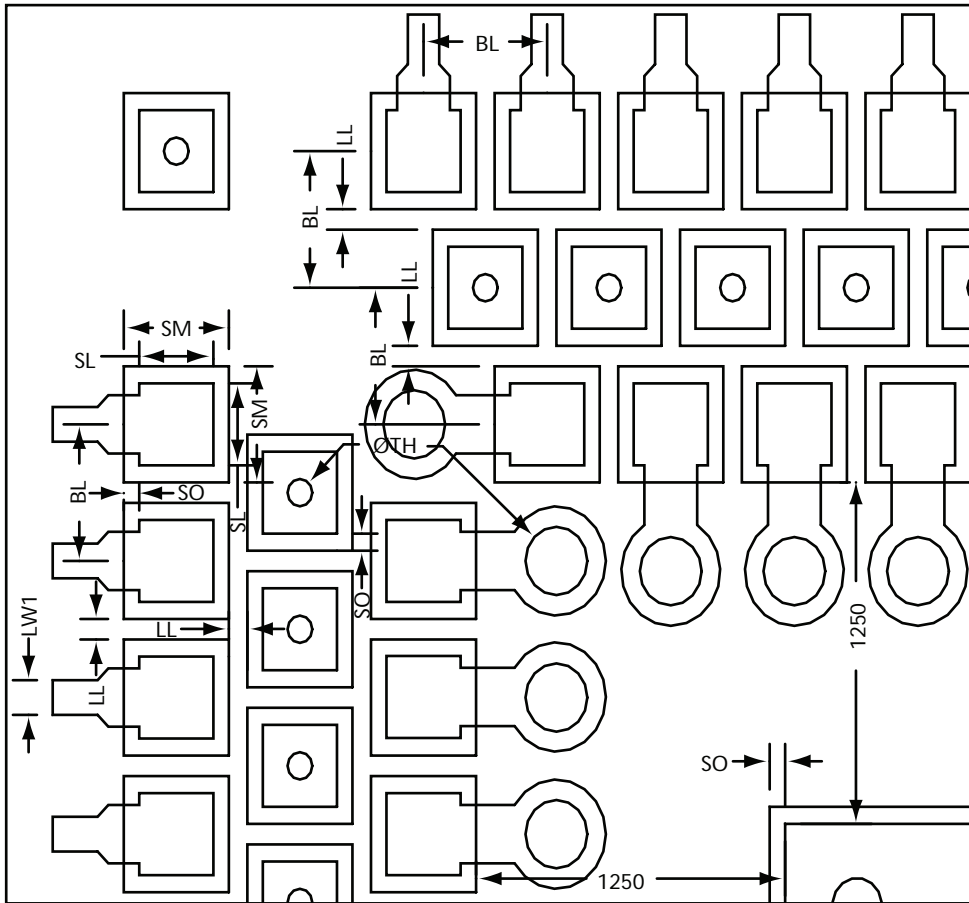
Suggested Board Layout of Soldered Pads for QFN Packages (PCB Bottom Layer)
